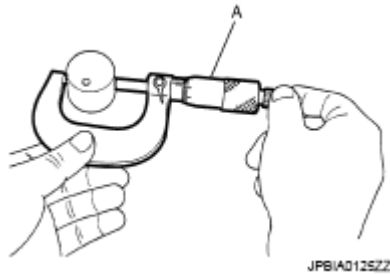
Measuring Outer Diameter Of Valve Lifter
